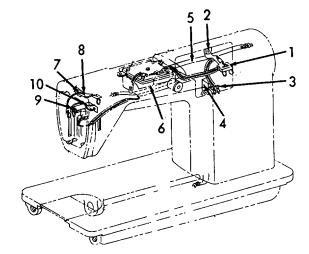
Upper (Arm) Lubricating Oil System, Installation.
